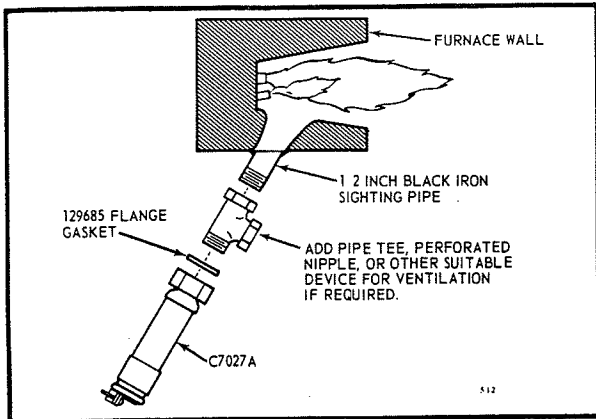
CUTAWAY OF A C7027A INSTALLED ON A FURNACE (VIEWED FROM ABOVE).
